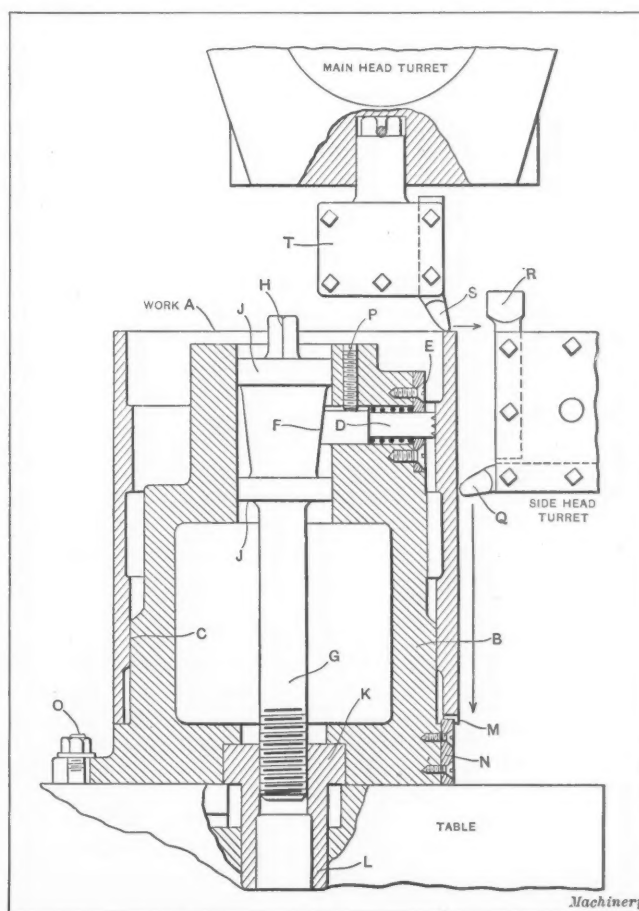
Second Setting for machining Casting shown in Fig. 7
